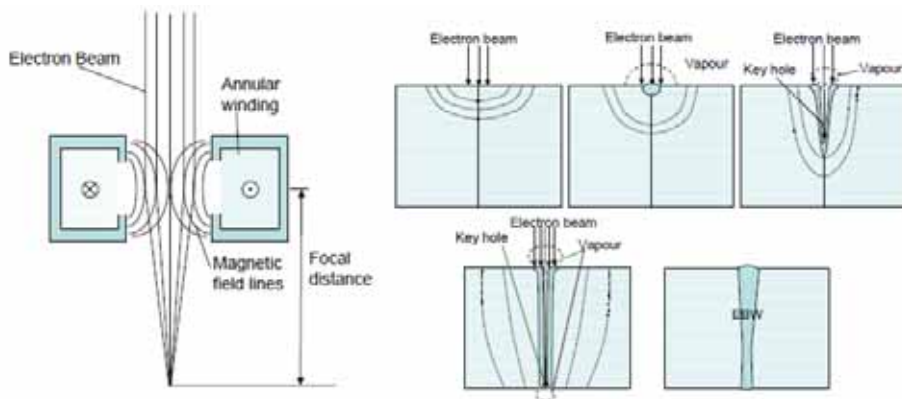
Principle of keyhole formation in electron beam welding.
